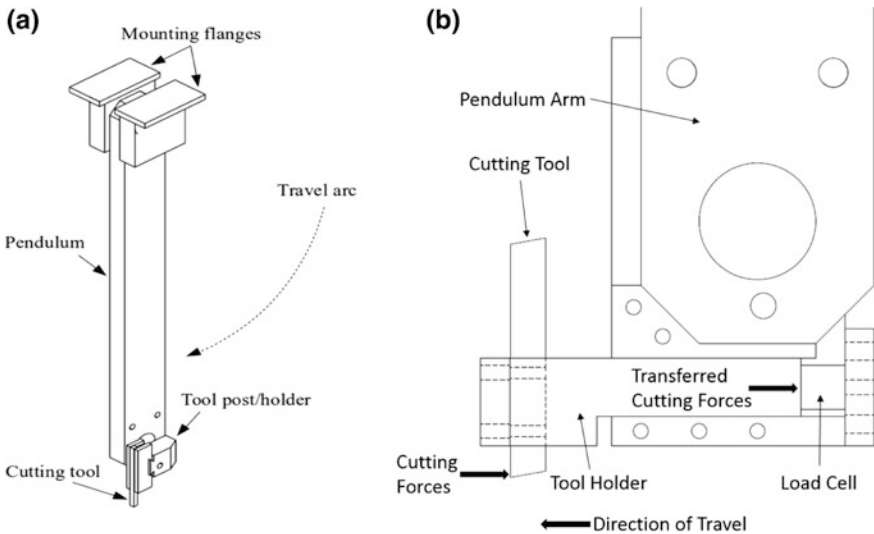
a Pendulum arm and b details of the tool holder and load cell mounted at arm tip
